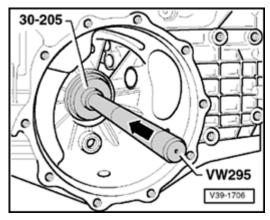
Driving outer race for small tapered roller bearing into transmission housing
